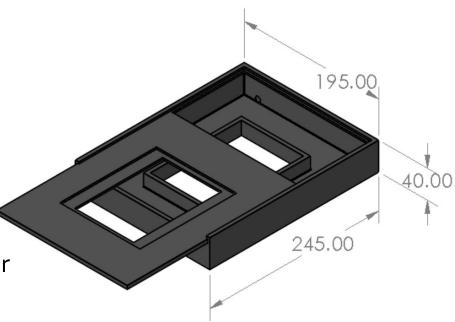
Solidworks Image of Preliminary Design #2 (all units in mm)
